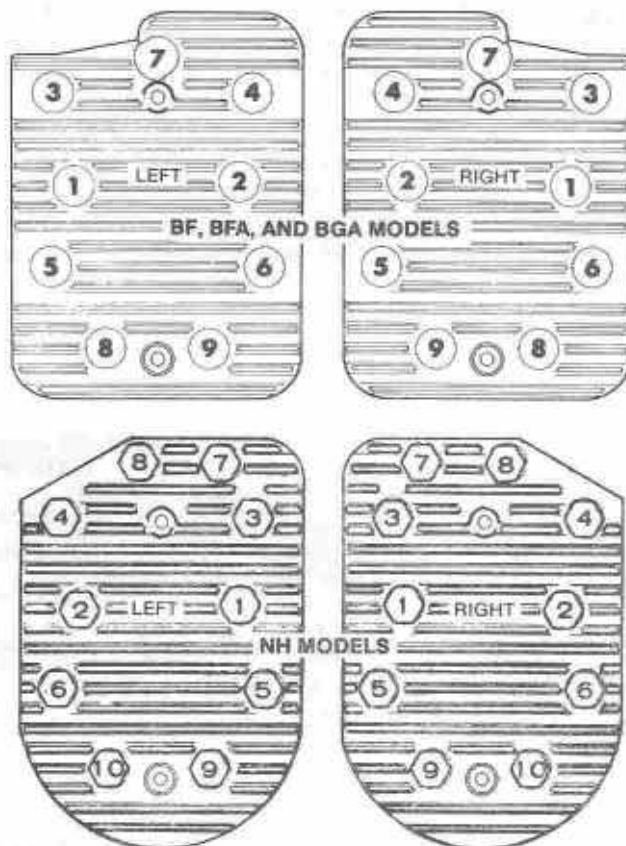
CYLINDER HEAD TIGHTENING SEQUENCE
